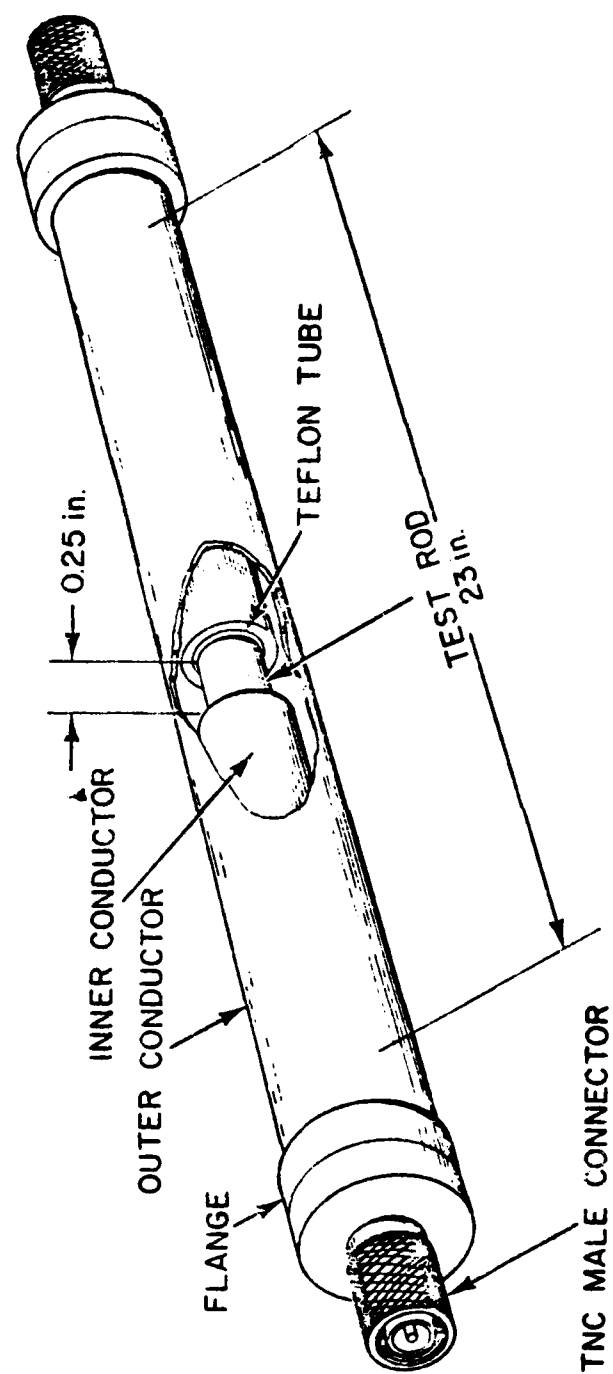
Cross-sectional view of the conducting material IM test fixture.
